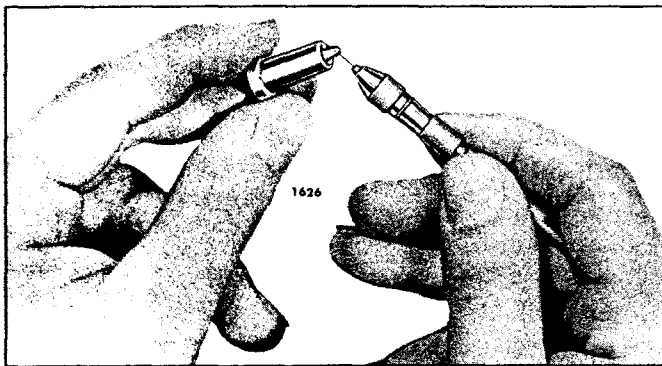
Cleaning Spray Tip Orifices Using Tool J 4298-1
